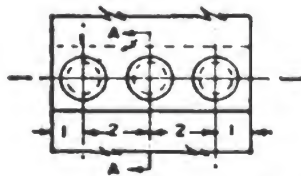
Pitch of spot welds with symbols on drawing.
